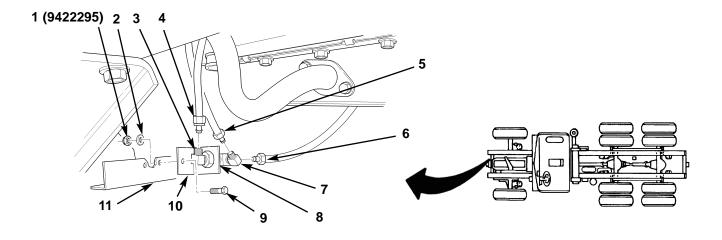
Installing Bulkhead Bracket and Connecting Tubes.
